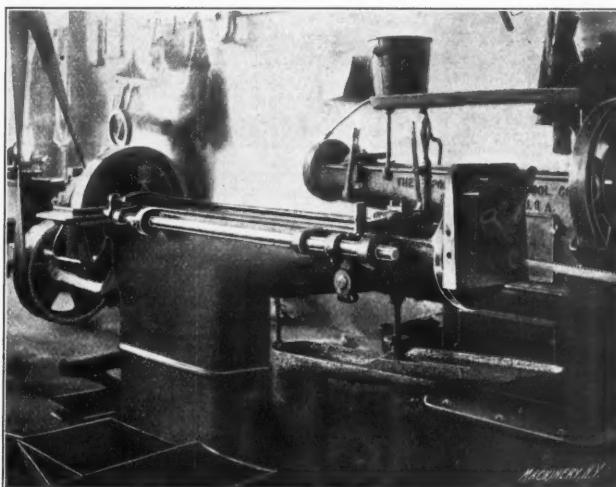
Draw-cut Broaching Machine, showing Single Keyway Broach and a Jig for Holding Front Axle Part.
